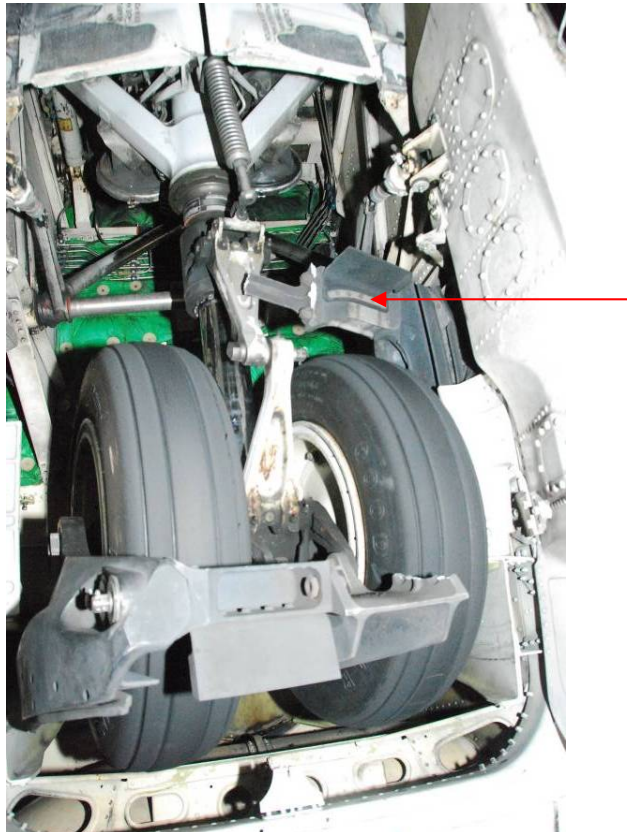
Damaged and distorted nose landing gear spray deflector
